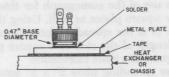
MOUNTING THE PRESS-FIT PACKAGE WITH TAPE INSULATION
